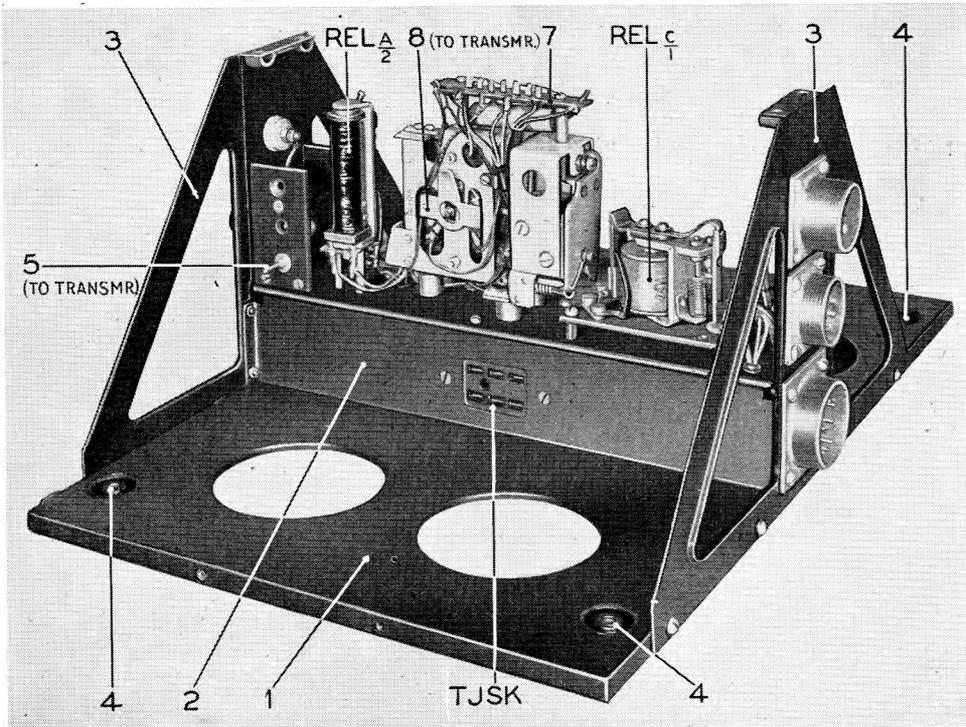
CHASSIS ASSEMBLY, FROM LEFT-HAND SIDE
